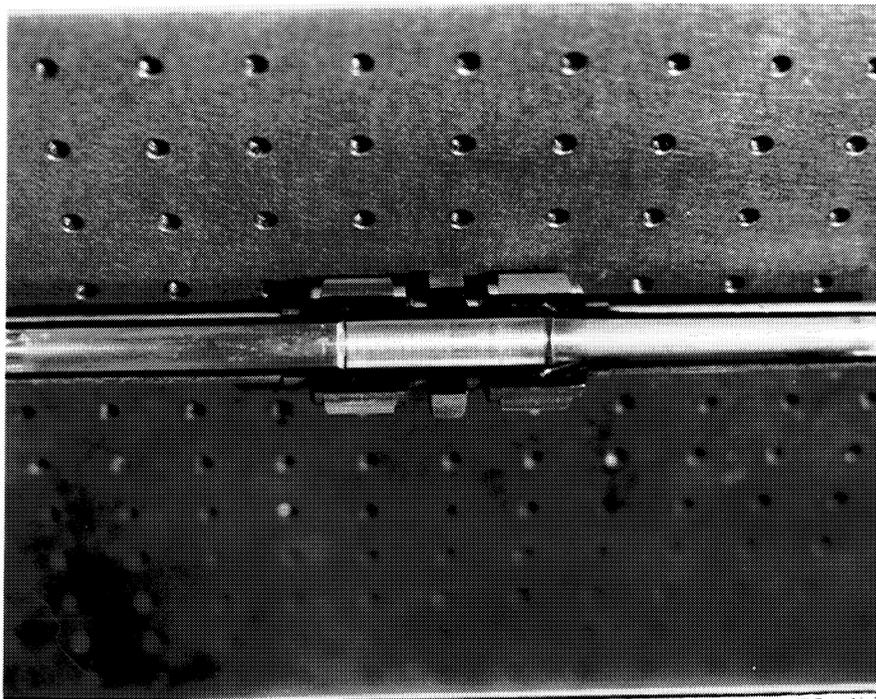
A photograph of the AN fitting-tubing assembly showing the 90^o access port required to illuminate the inner surface of the tubing.
